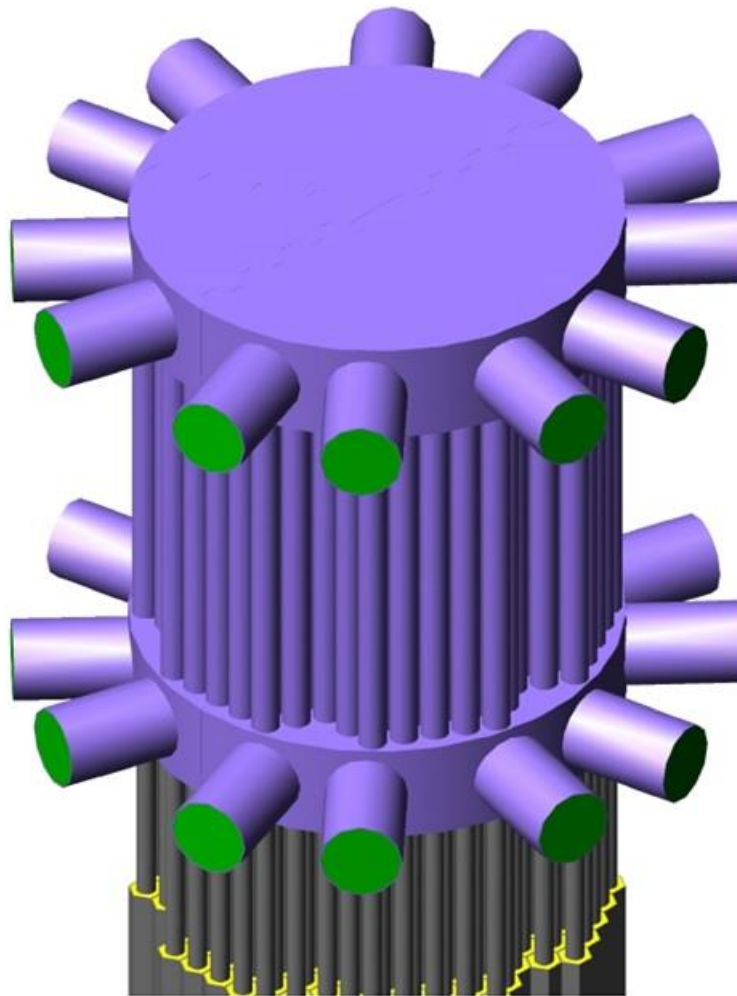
Coupling of heat pipes geometry and heat exchanger geometry
